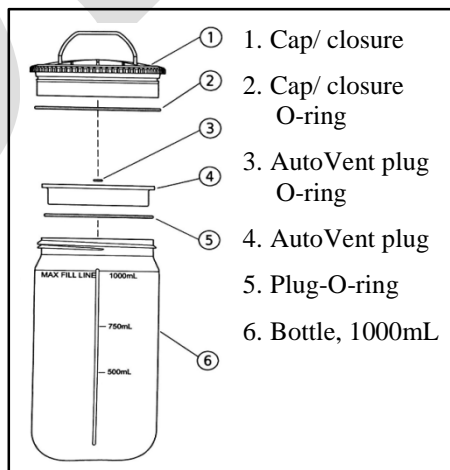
1000-mL bottle assemblies used in JLA-8.1
